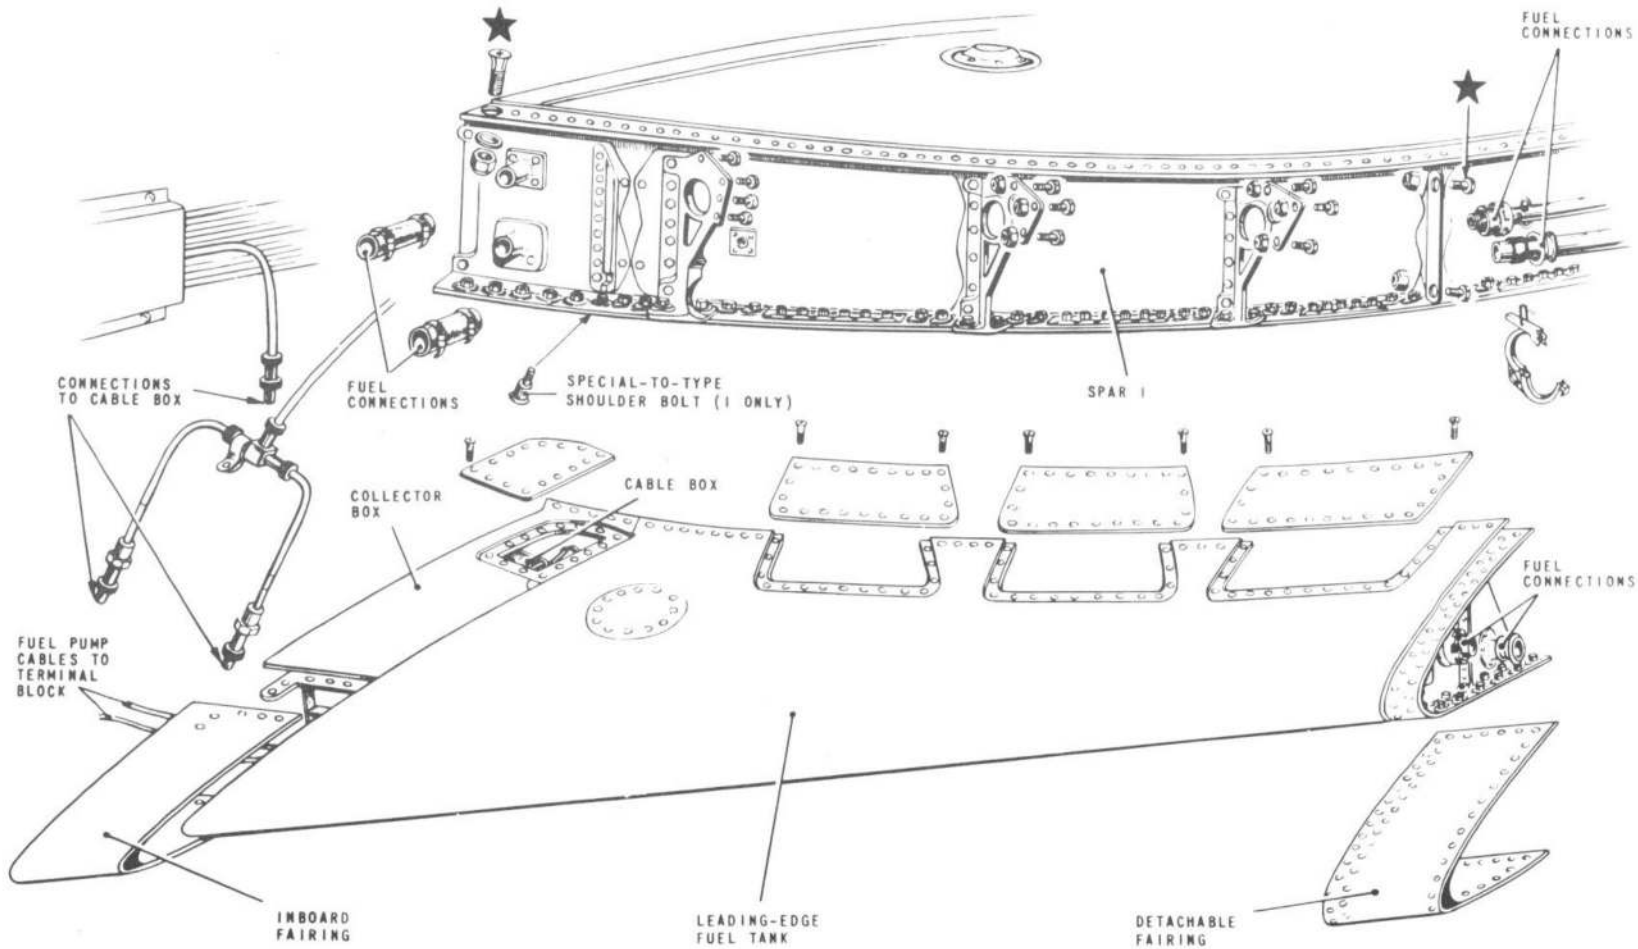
LEADING-EDGE FUEL TANKS - REMOVAL AND ASSEMBLY
